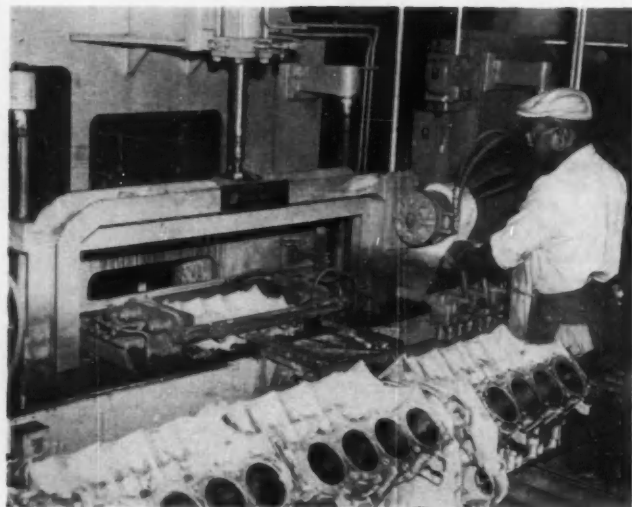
Pressure testing aluminum V-8 cylinder block castings.
